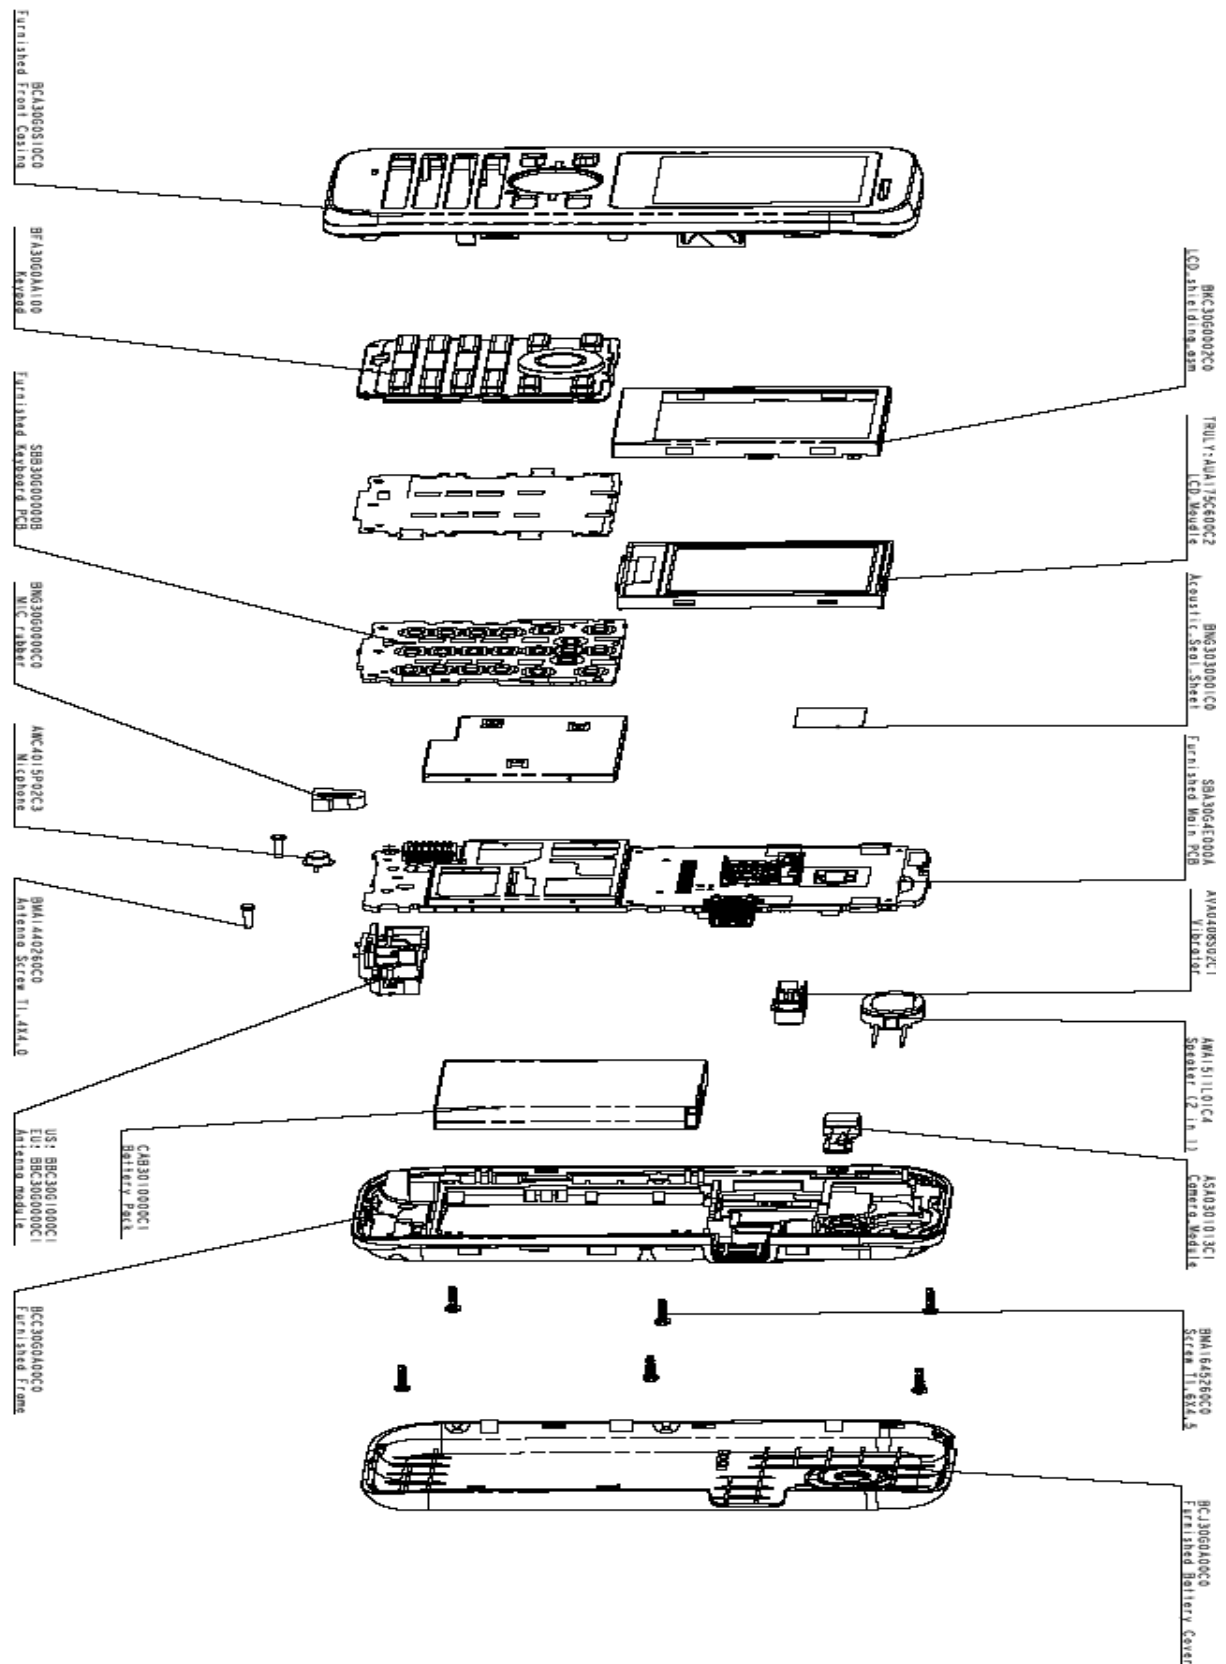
EXPLODED VIEW OT-600 (A)
